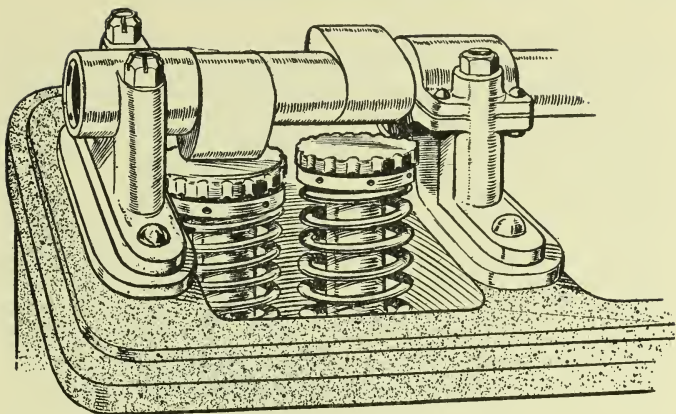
SKETCH SHOWING THE RELATIVE POSITION OF VALVE OPERATING CAMS THAT ACT DIRECTLY ON FOLLOWERS SECURED TO THE END OF THE VALVE-STEM IN THE HISPANO-SUIZA ENGINE
